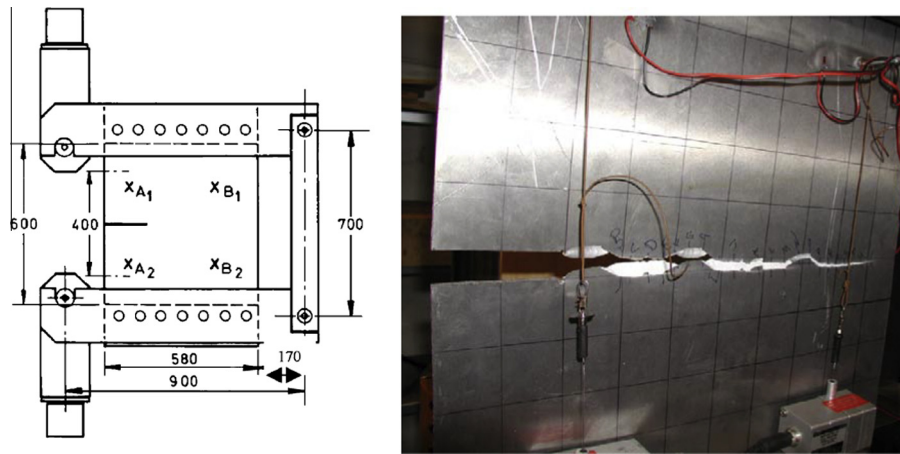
Experimental load frame and fractured aluminum plate [18].
